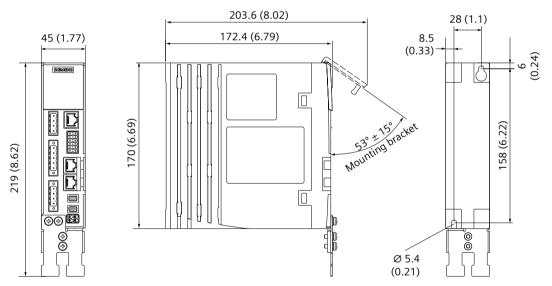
Dimension drawing SINAMICS S210 FSA, 1 AC, dimensions in mm (inch)
